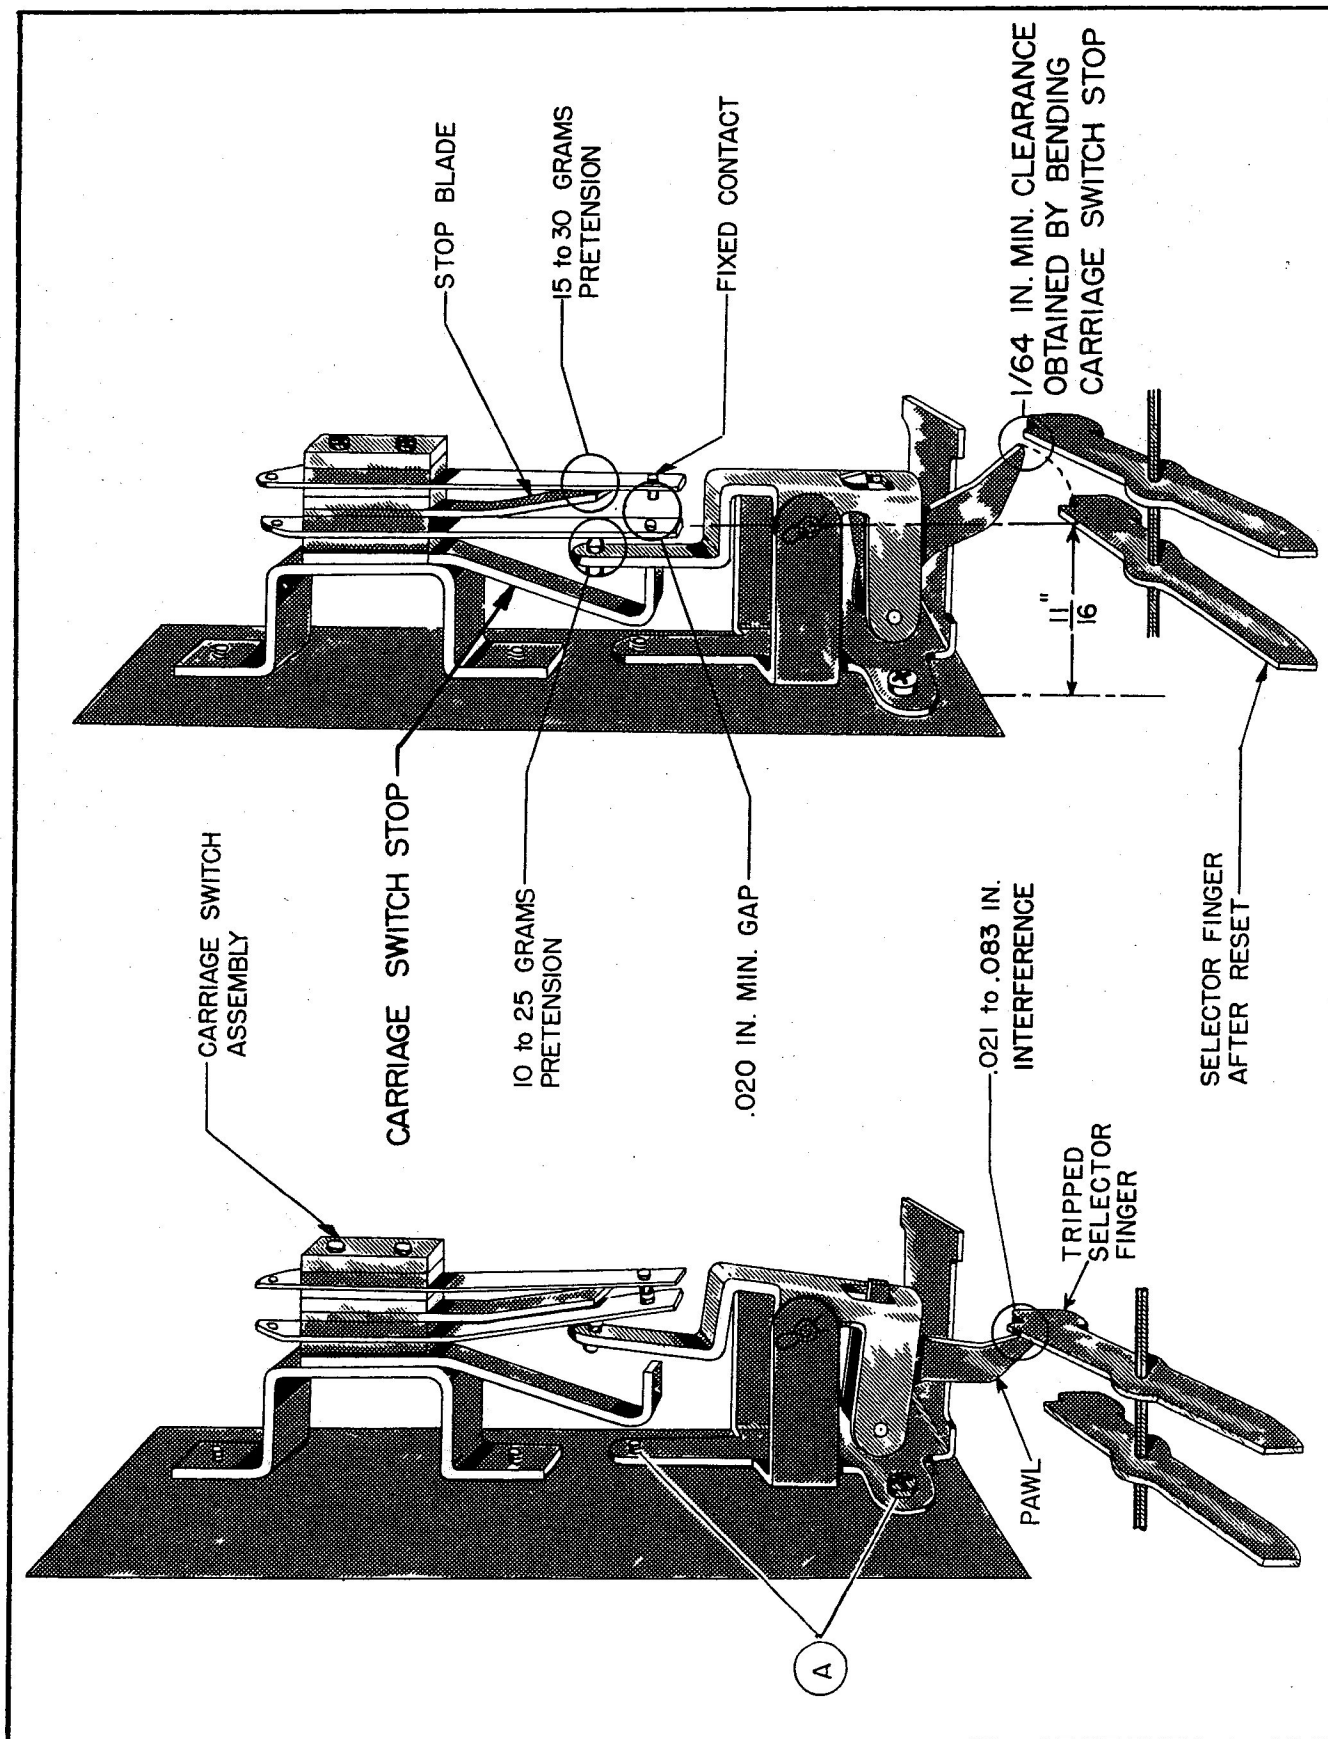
CARRIAGE SWITCH ADJUSTMENT
